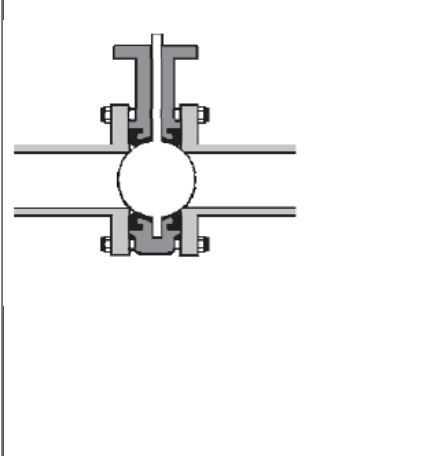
Final Valve Alignment and Tightening of Flange Bolts
